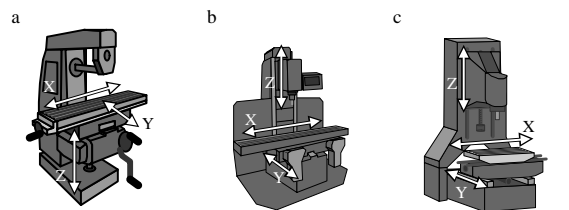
Machine tools used in the experiment; (a) Small machine; (b) Medium machine; (c) Large machine.
